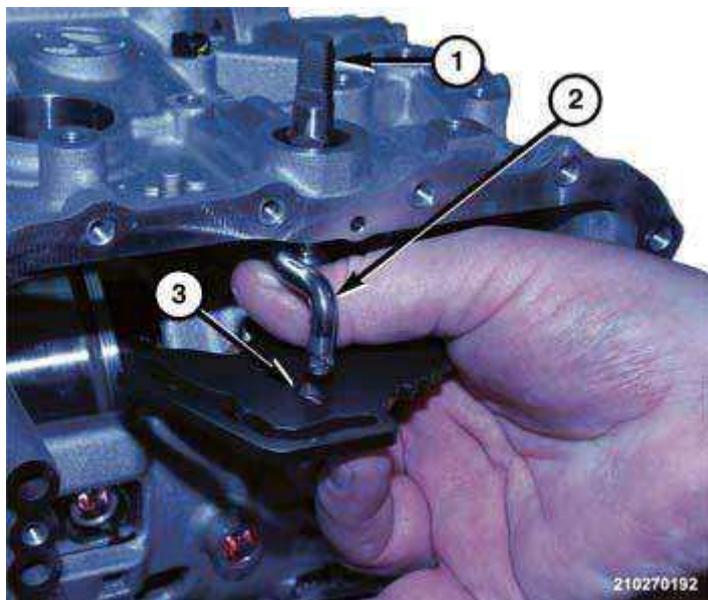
Manual Shaft, Park Rod & Key Hole Slot
